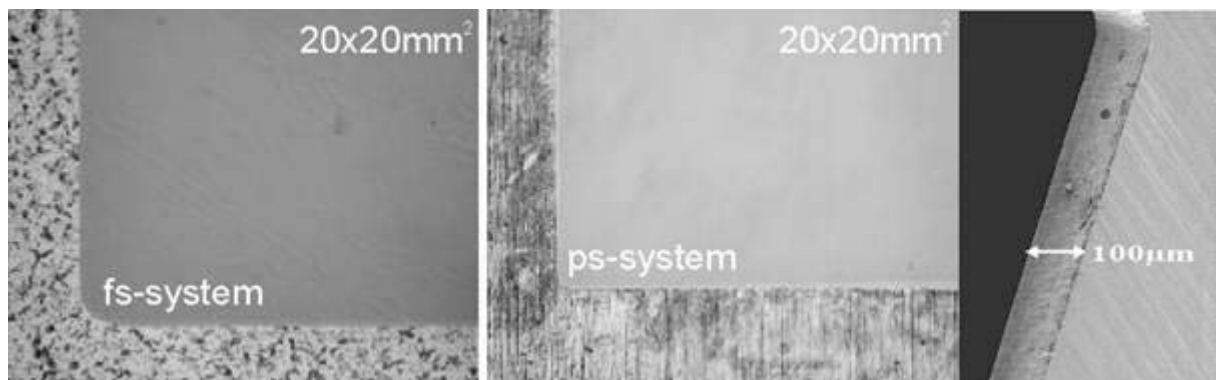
Cutting of 100 μm steel sheet with a STACCATO laser
